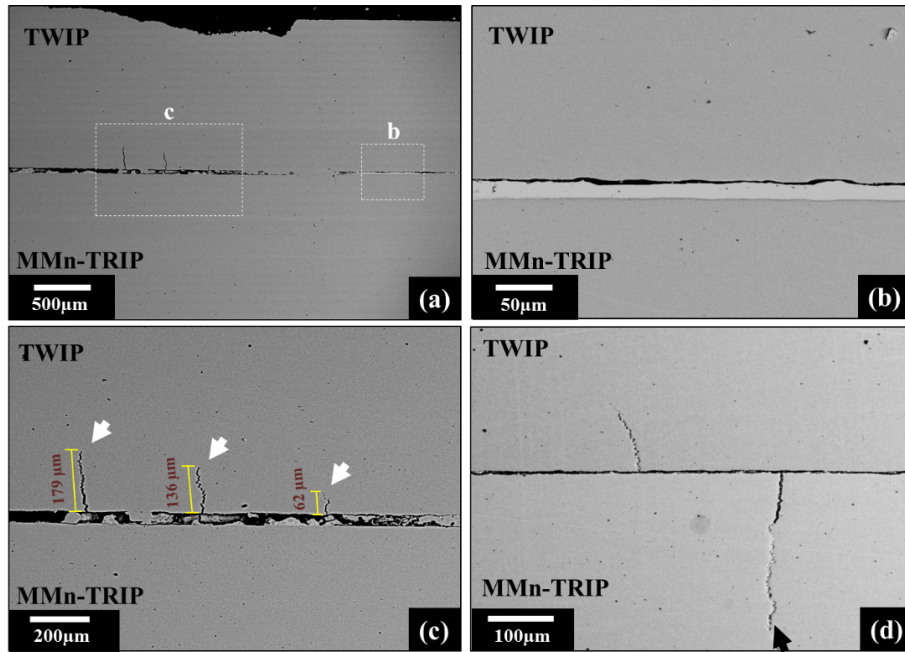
SEM micrographs showing (a) overview of LME cracks formed within the HAZ, (b) Zn-coating between two sheets, (c) LME cracks in TWIP side of the joint, and (d) representative LME crack in MMn-TRIP side of the joint (black arrow).
